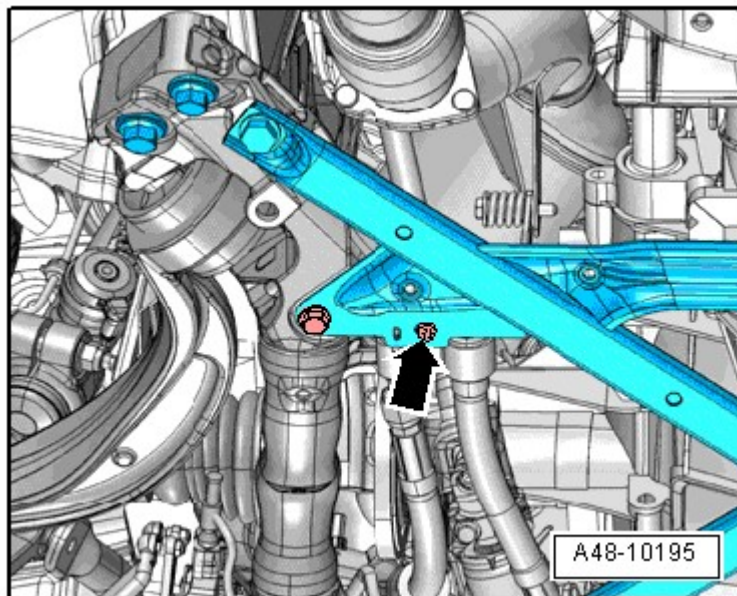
Identifying Bolt For Power Steering Hydraulic Oil Pressure Line
